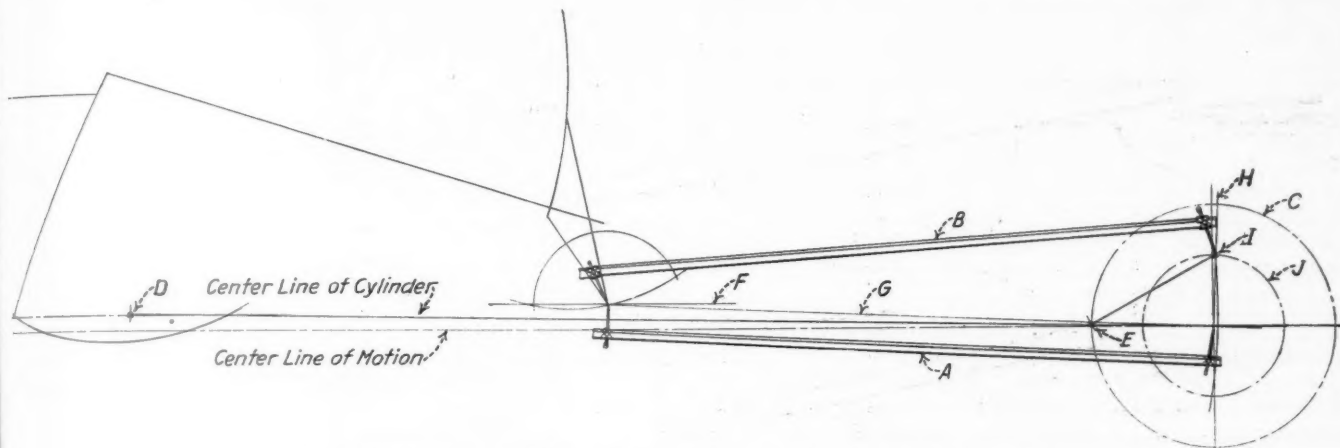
Laying-out Walschaert Gear When No Drawings Are Available
